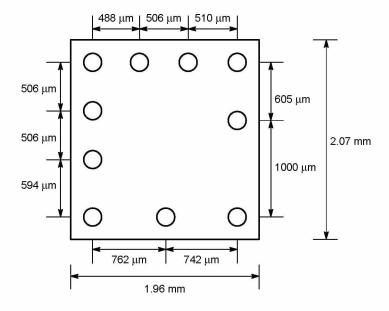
Flip Chip Dimensions and Solder Bump Locations, Bump Side Up
